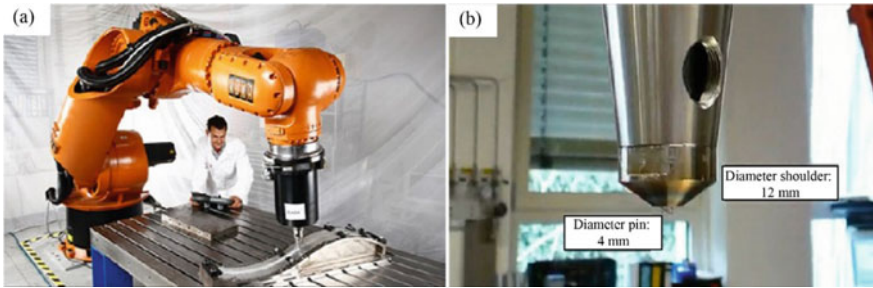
Robotic SSFSW₂ by EADS: a welding equipment and b stationary shoulder [13]
